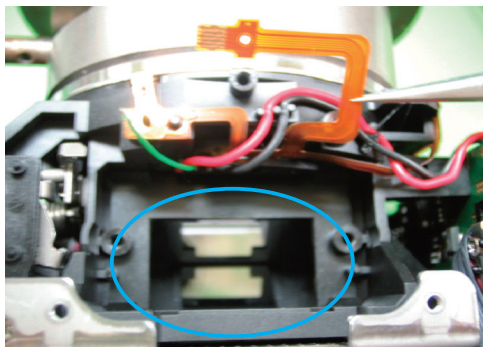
Auto Focus FPC Ass'y Assembly 1
